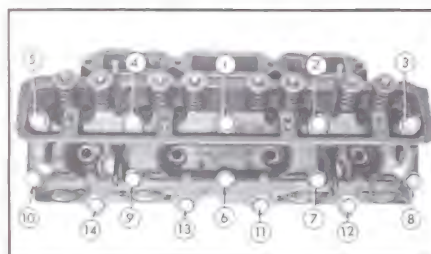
Cylinder Head Bolt Tightening Sequence
